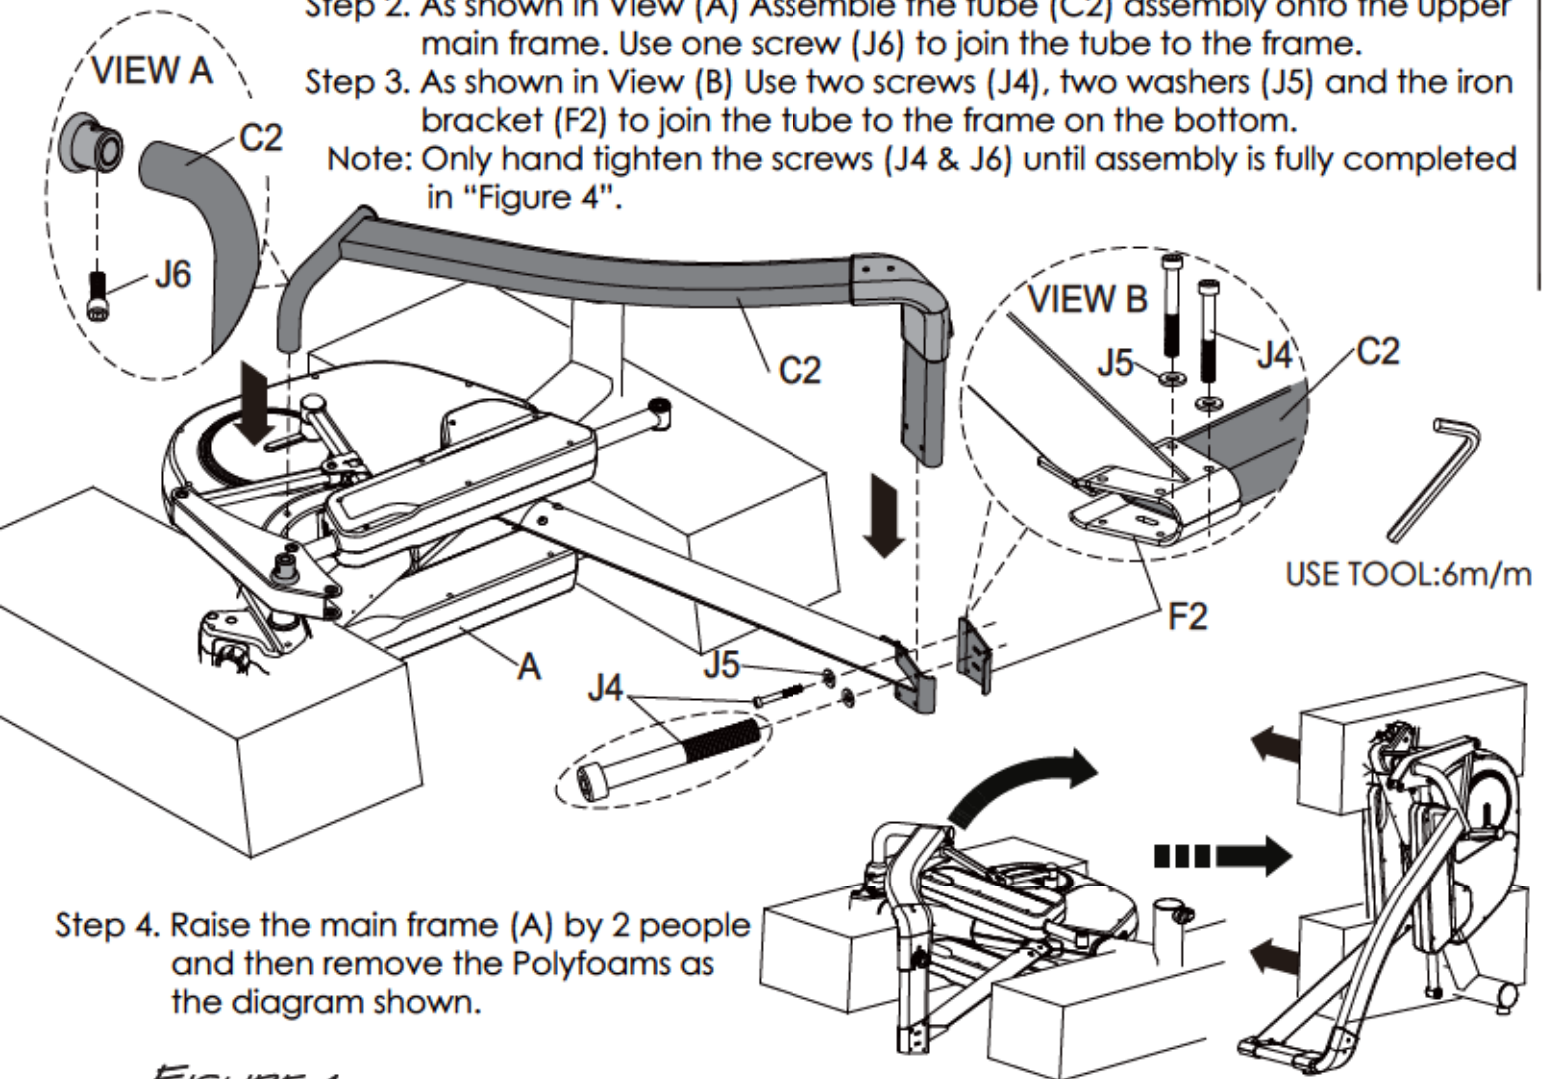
RIGHT SIDE CONNECTING TUBE ASSEMBLY
